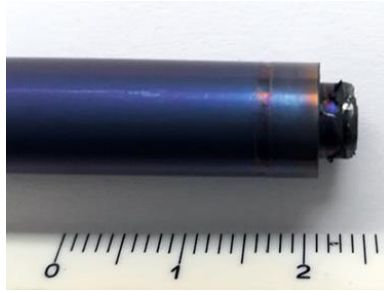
Detail of sample with spalling coating after TIG welding.
